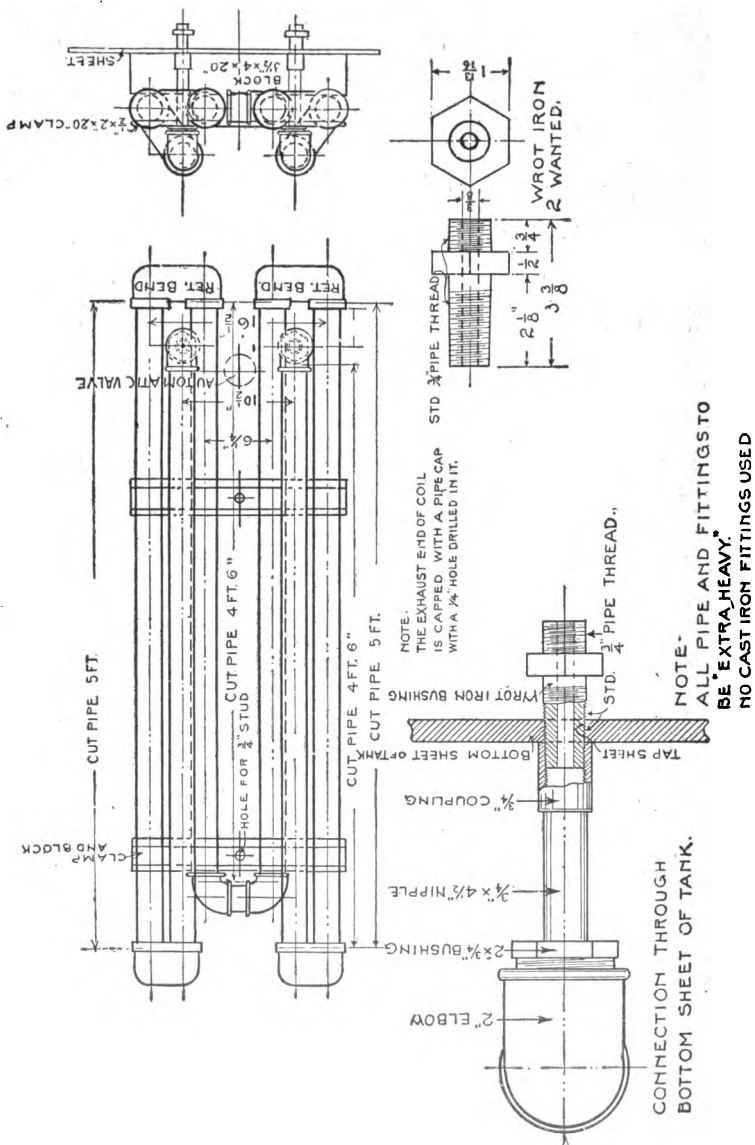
shows the arrangement of piping on the tender as adopted by the Santa Fe system.
